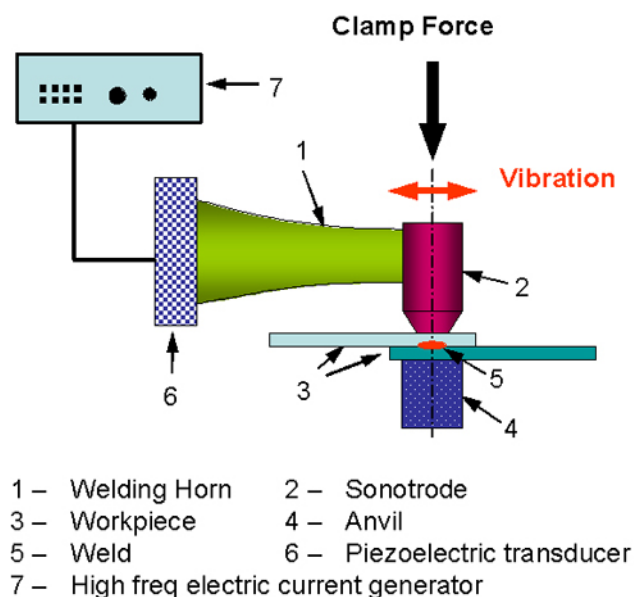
Schematic setup of ultrasonic welding process.
